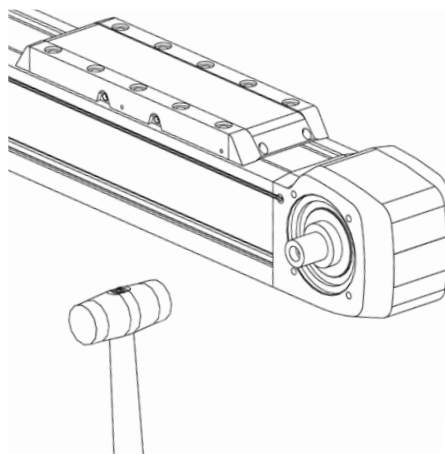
Inserting the journal in the HM-B linear axis drive block
